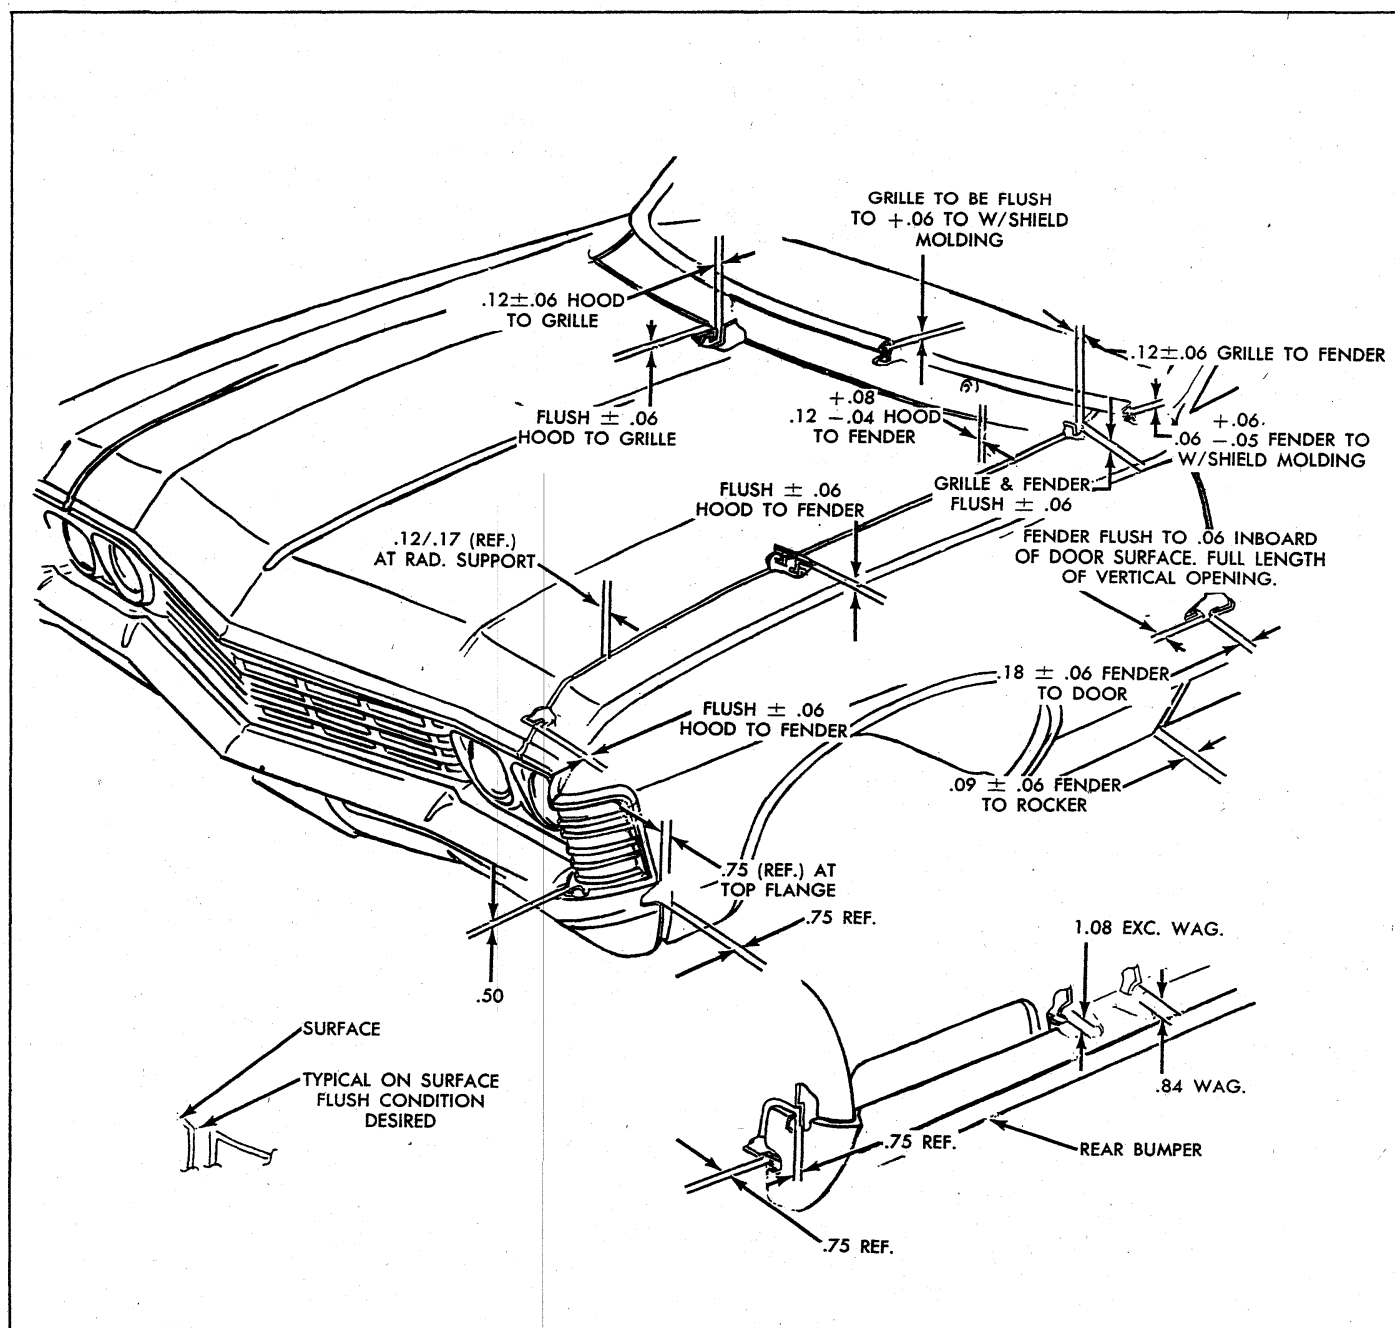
Sheet Metal Adjustments - Chevrolet
